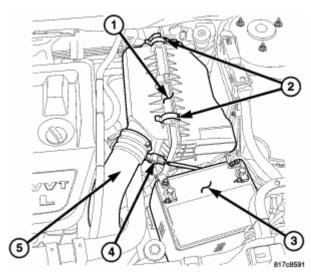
AIR CLEANER HOUSING Courtesy of CHRYSLER LLC
